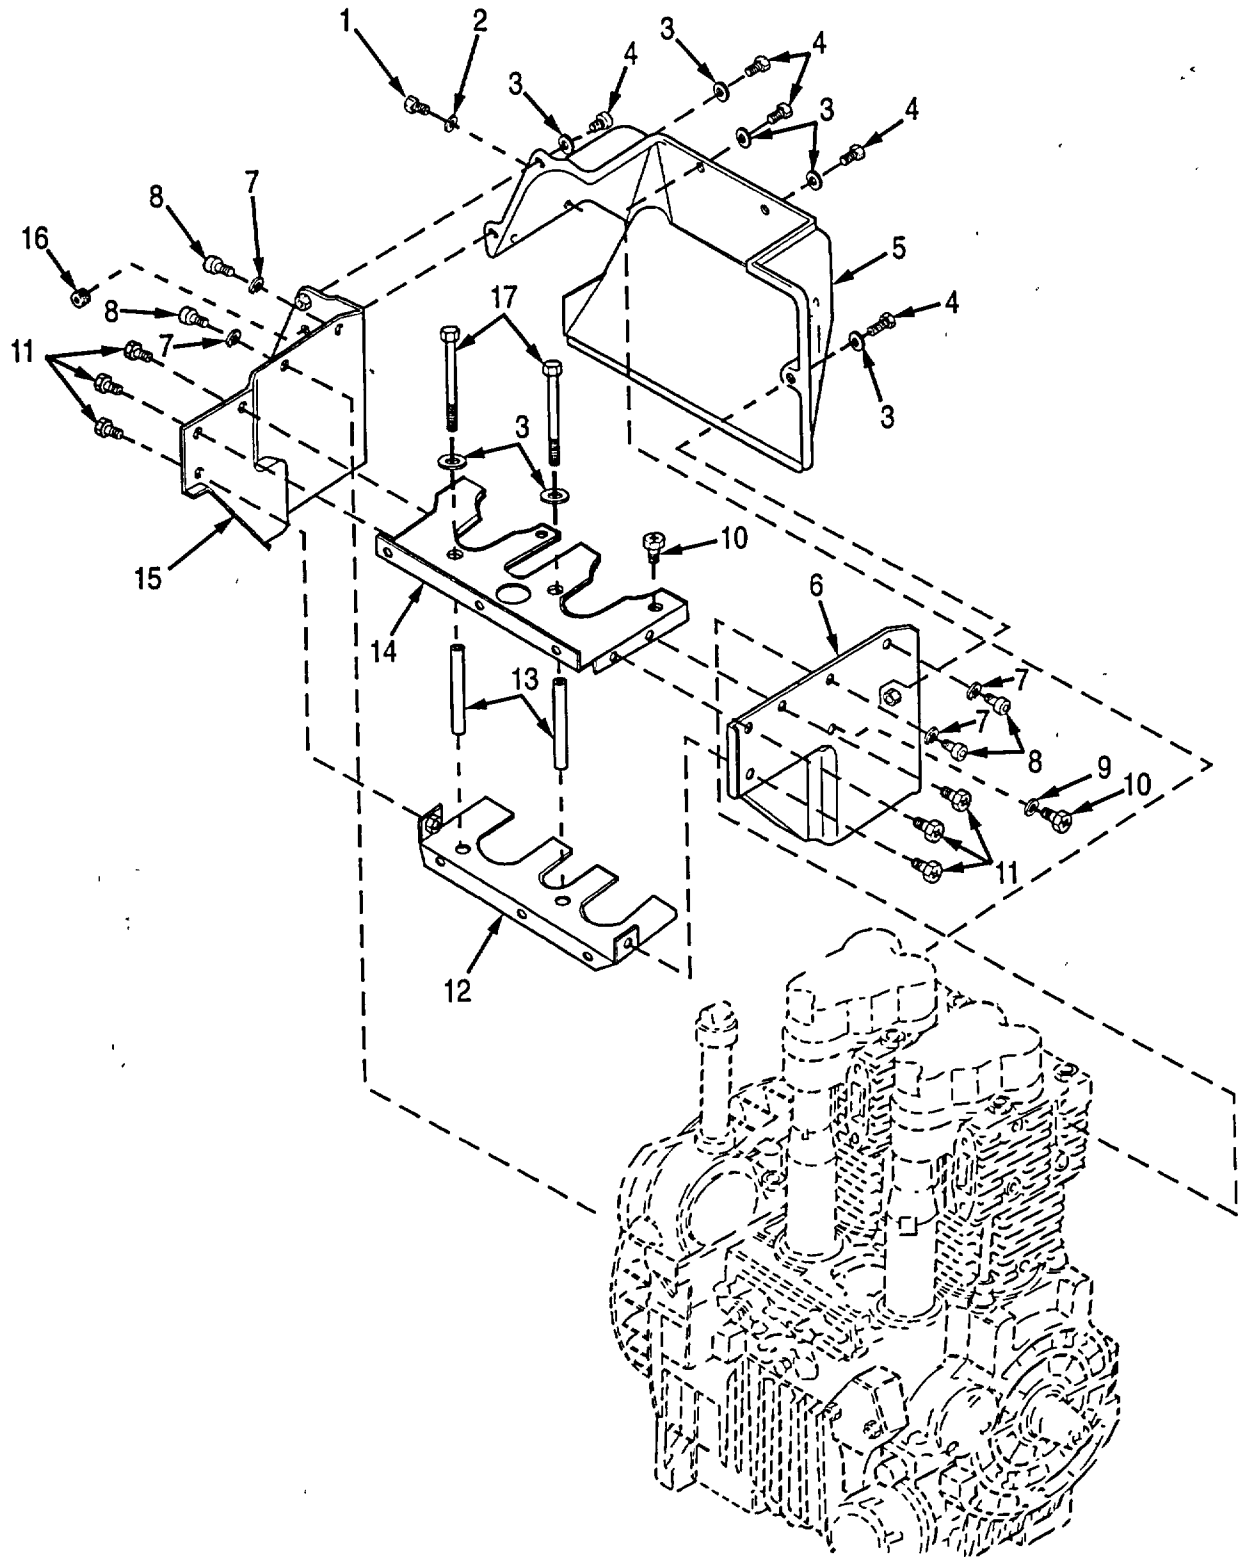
Engine Cowling, Ducts, and Shroud (sheet 1 of 2)
